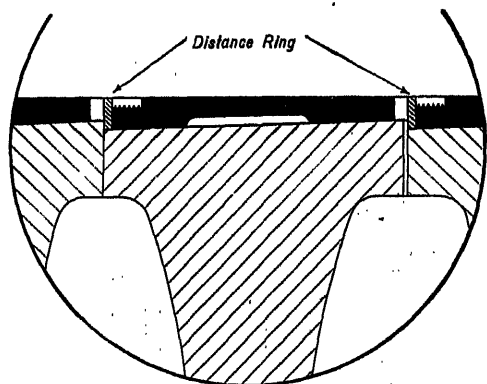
de Laval*, method of mounting and withdrawing discs
